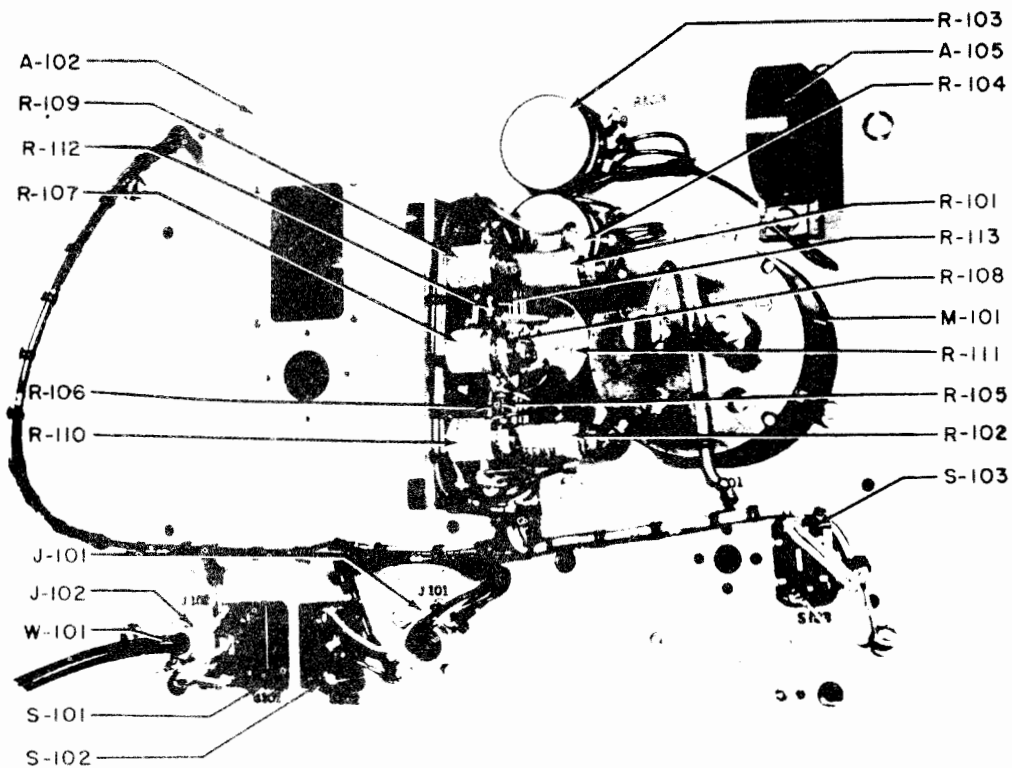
Rear View Panel with Microwave Assembly Removed
